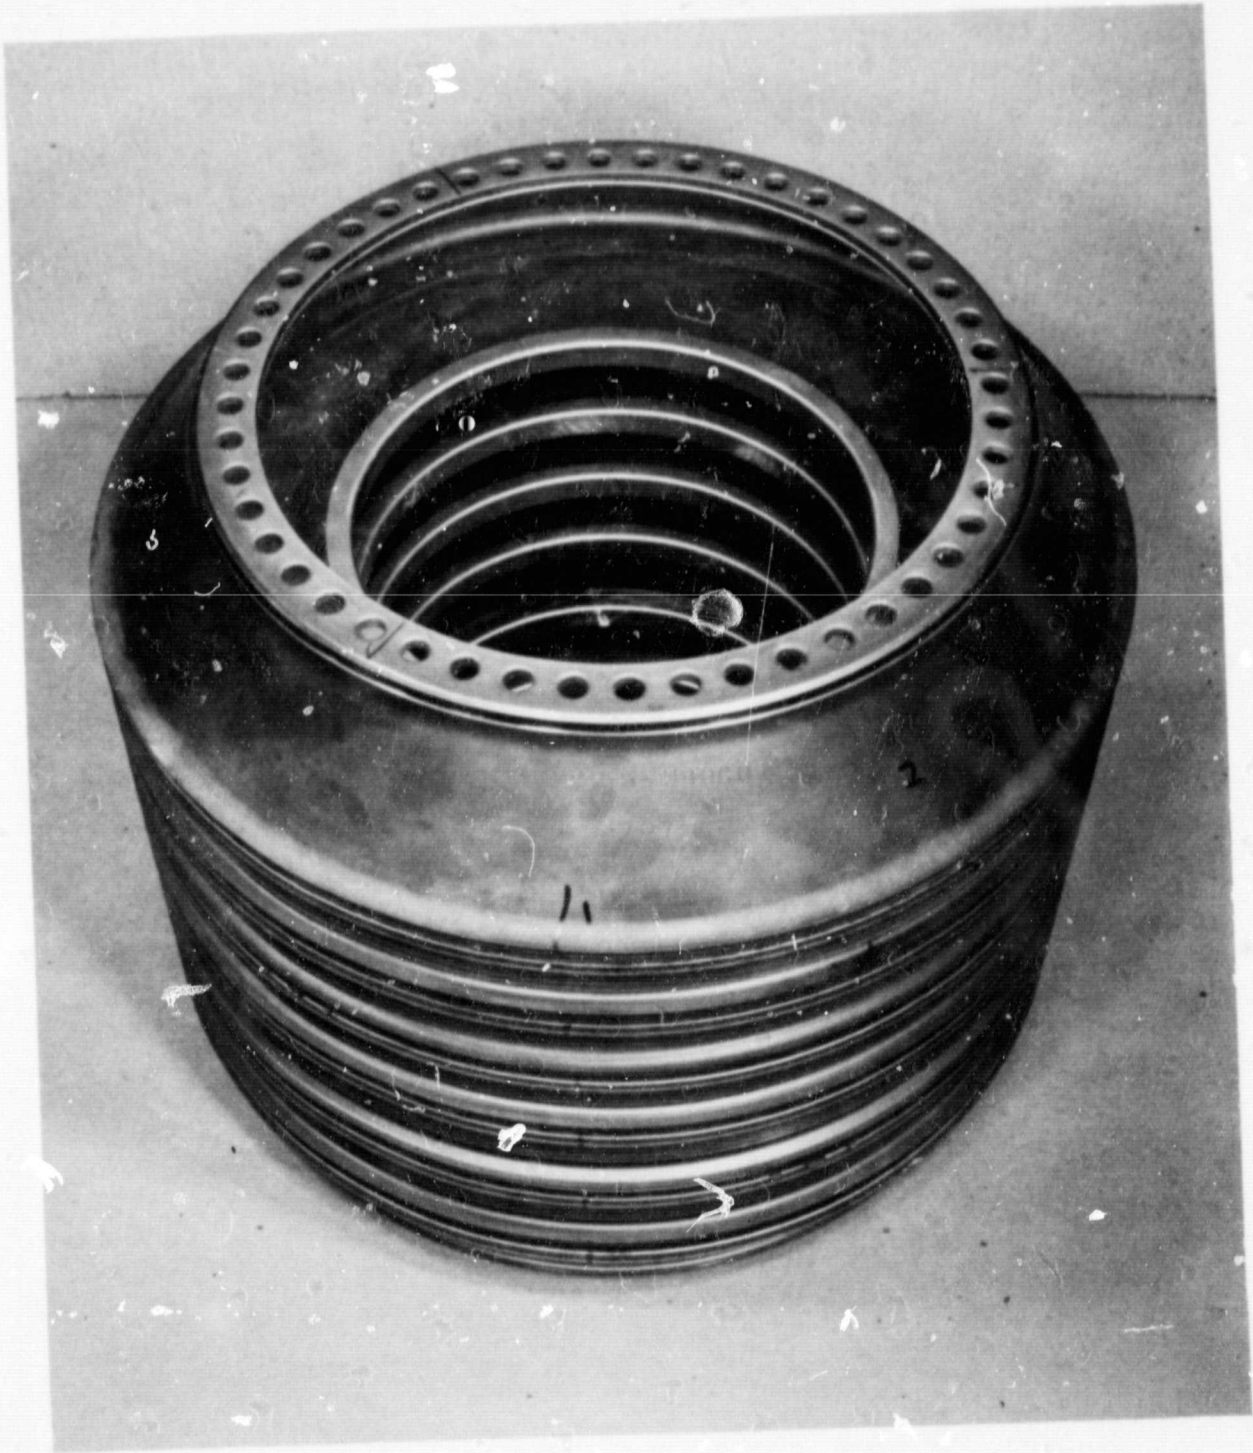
CFM56 Compressor Spool, S/N 9707, After Engine Test for
